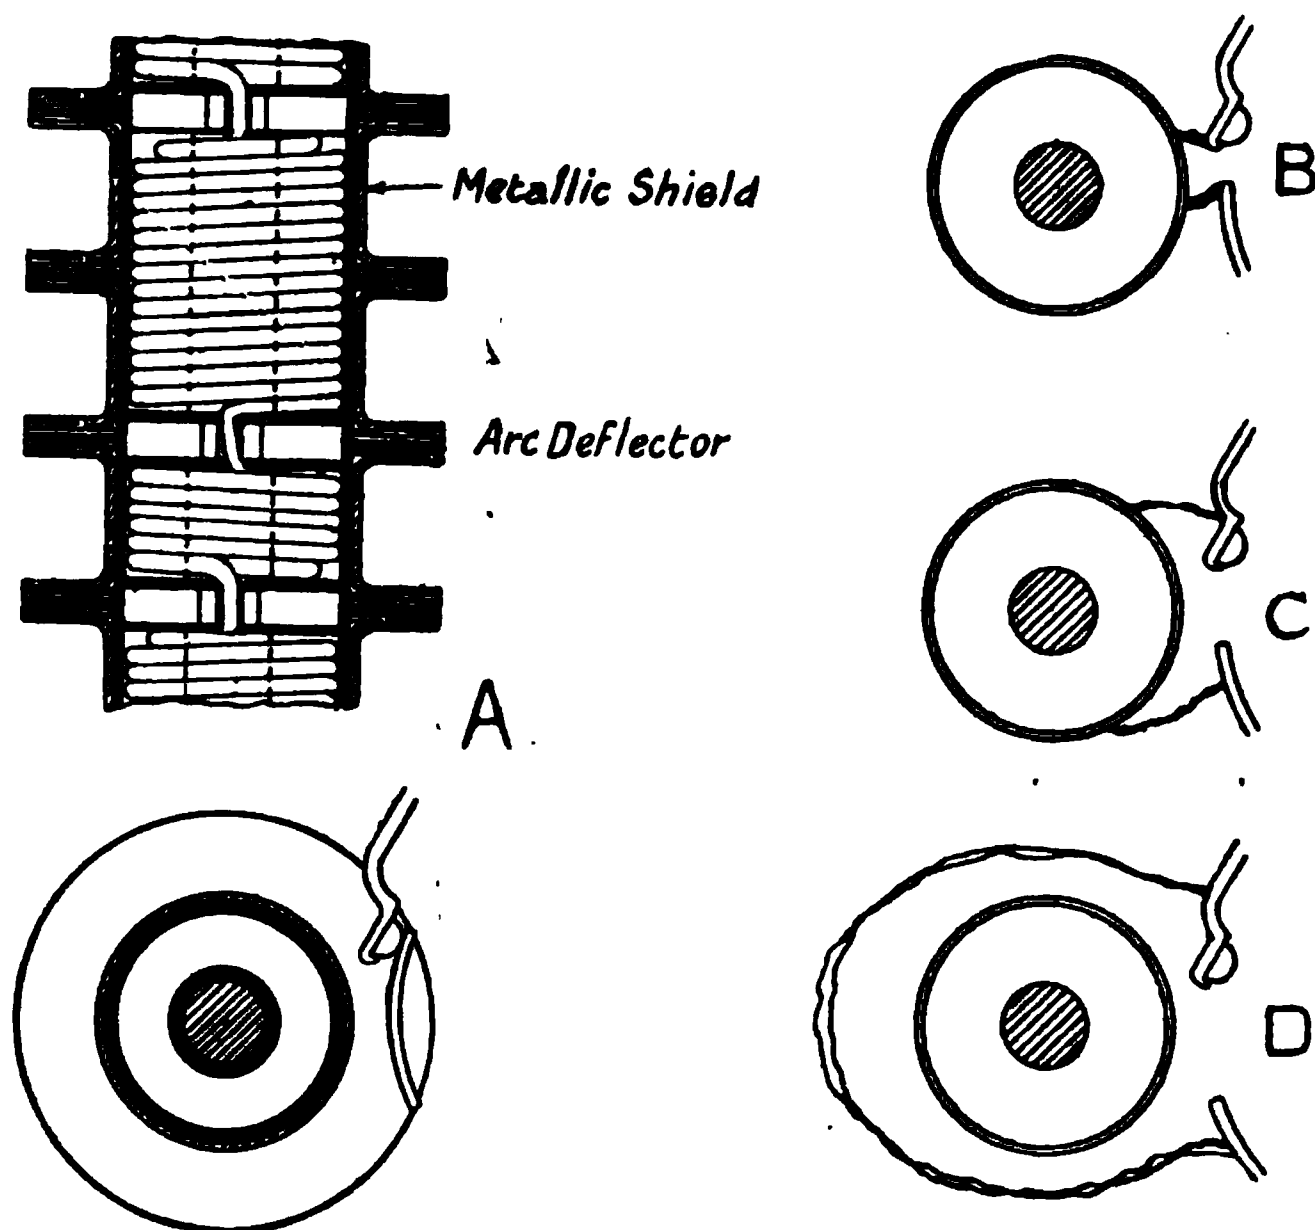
Dick-Kerr Metallic-shield Blow-out.
